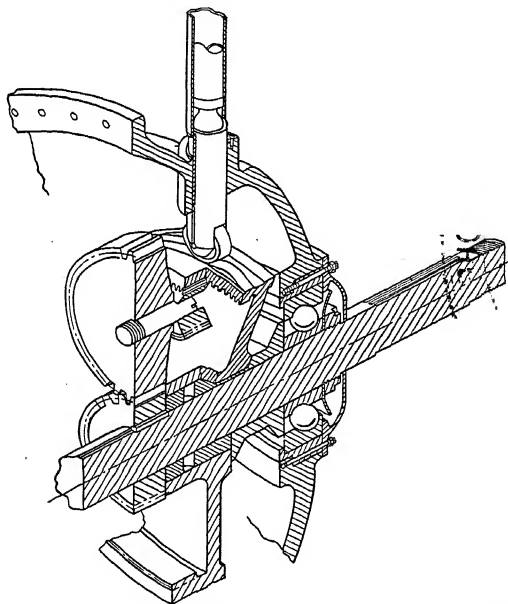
Usual valve-gear arrangement for radial engines.
